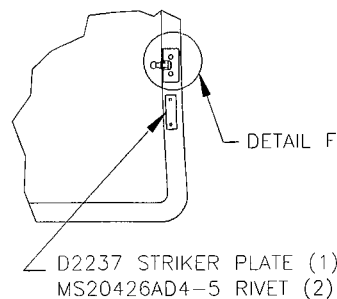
TYPICAL DOOR FRAME (AFT EDGE)
